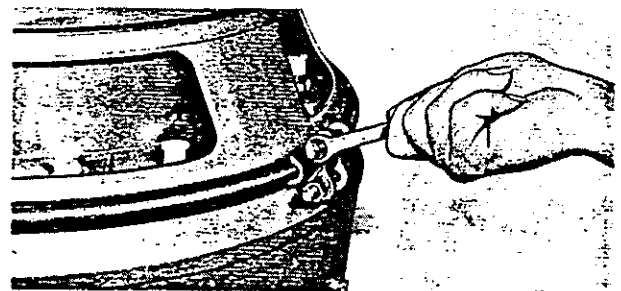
Removing V-Band Coupling Bolts and Nuts
